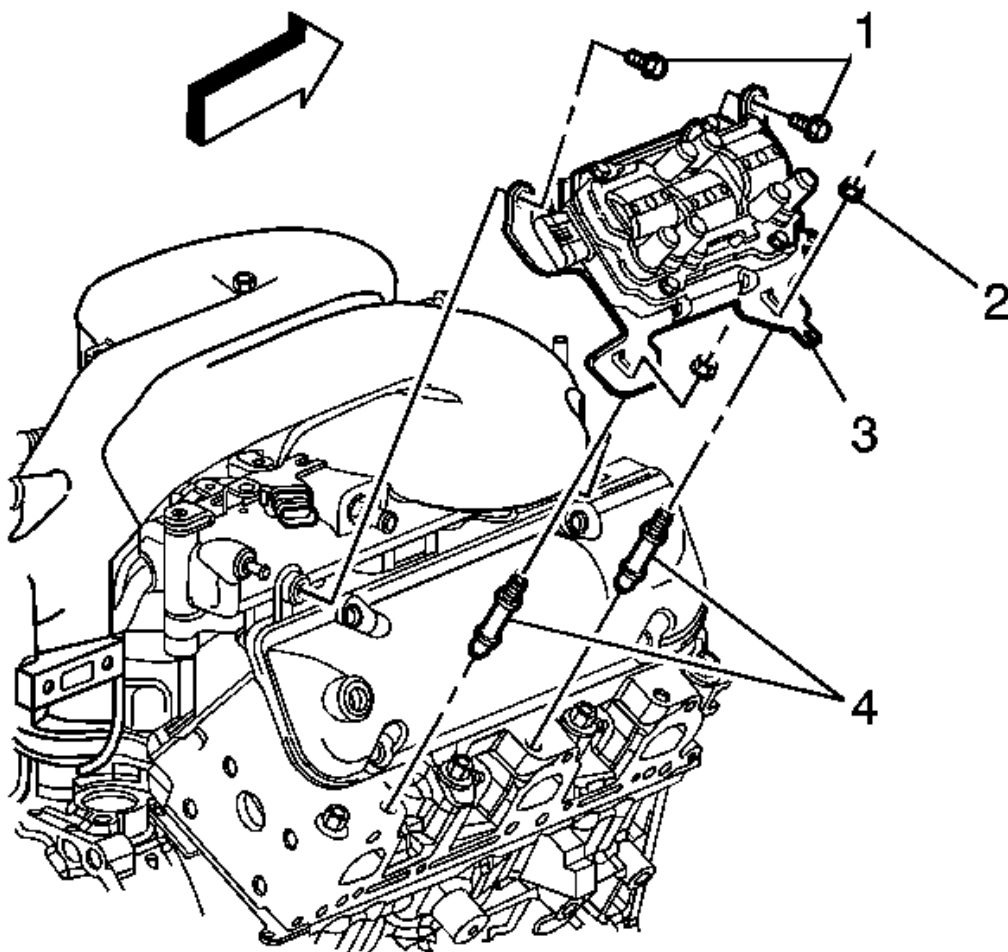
Identifying Ignition Coil Bracket Bolts & Nuts
